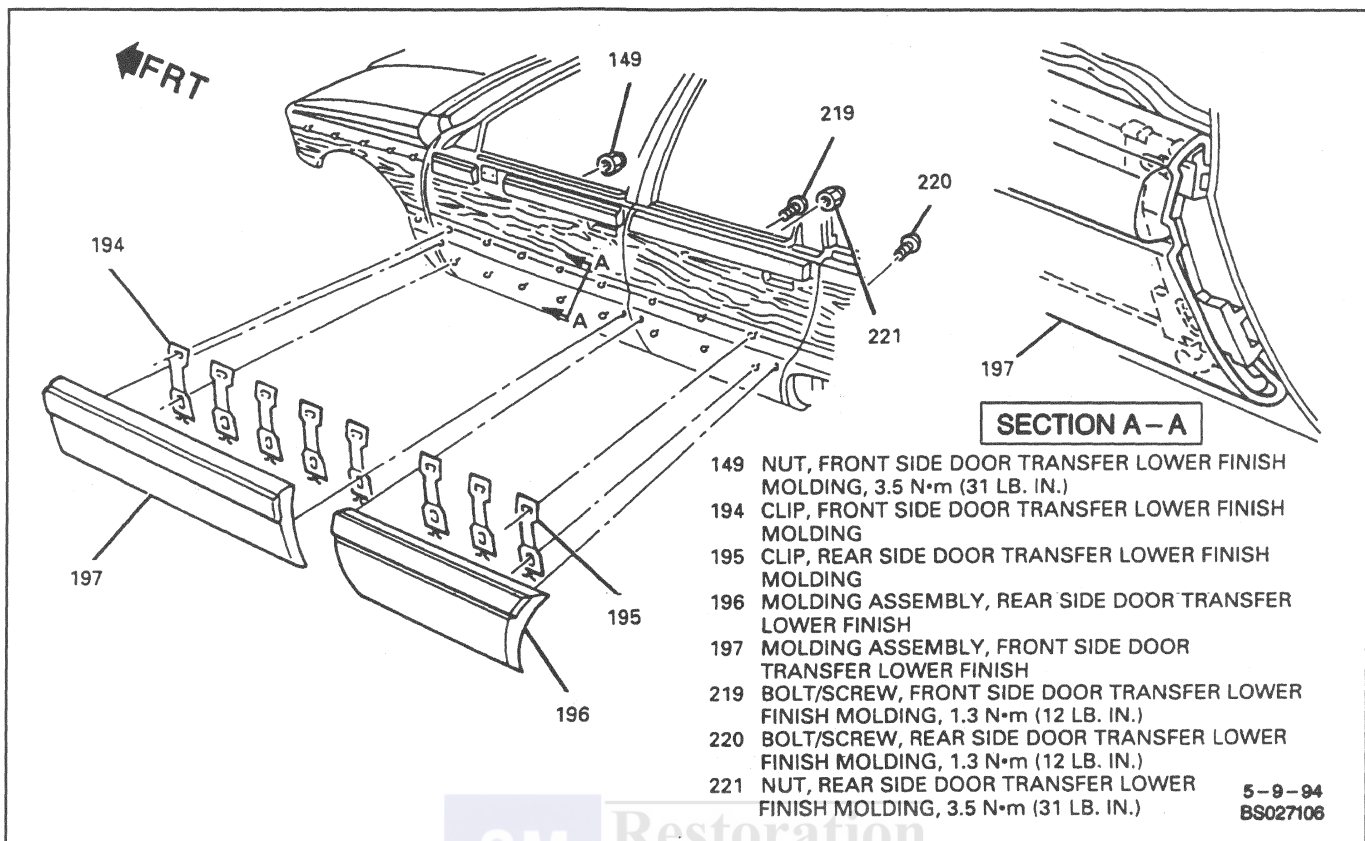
Wood Grain Side Door Transfer Lower Finish Molding-(Buick Wagon)
